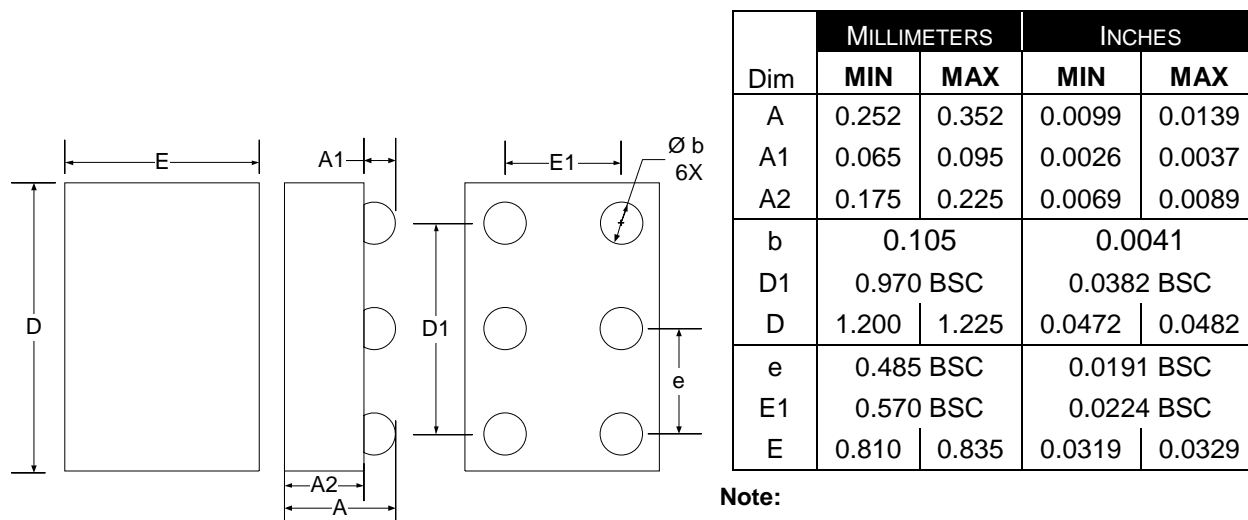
6 Bump X2CSP Micro SMD Package Dimensions
